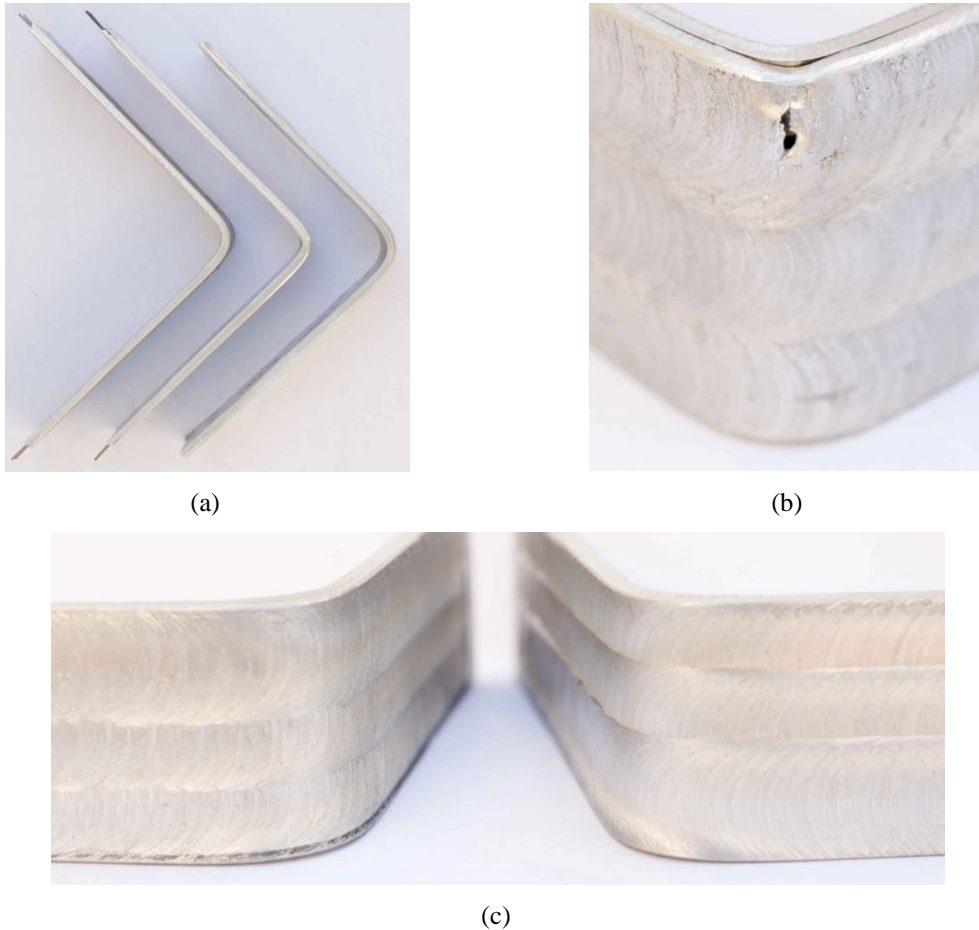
Composites bending test samples; (a) general view of the bent samples at the maximum angle of 44 °, (b) detail view of sample D1 with a minor crack initiation, (c) close-up of the tensile solicited faces without rupture.
